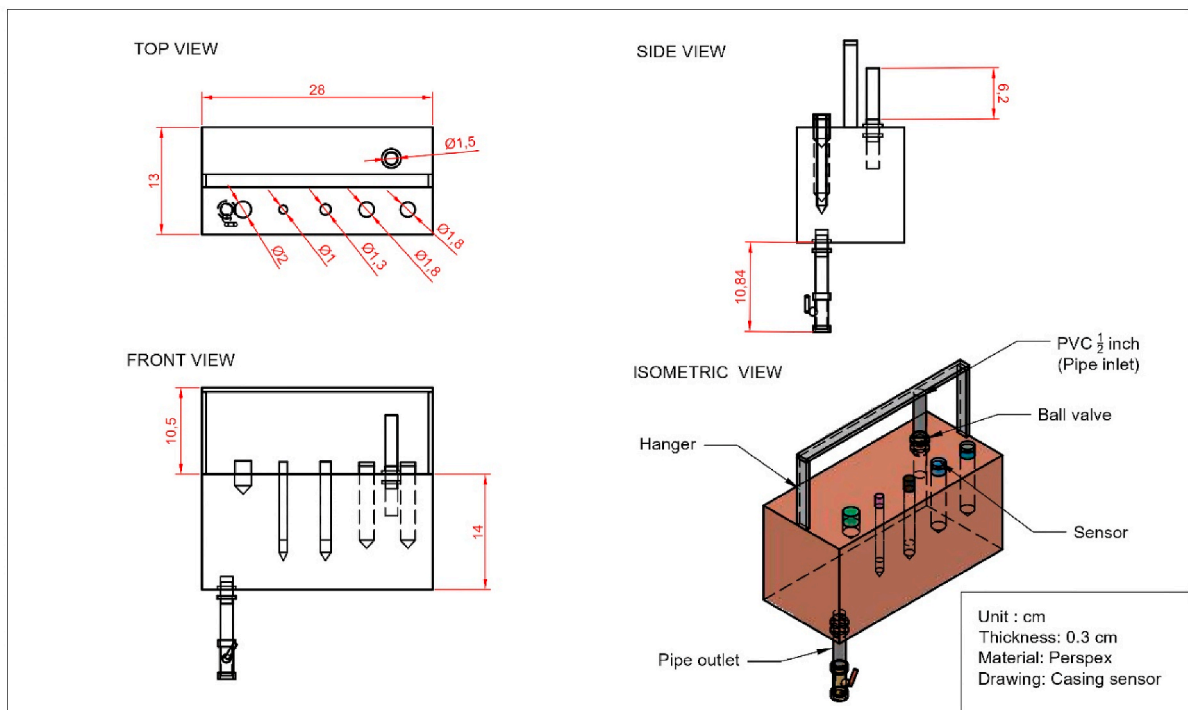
Sketch of casing sensor using AutoCAD 3D.
